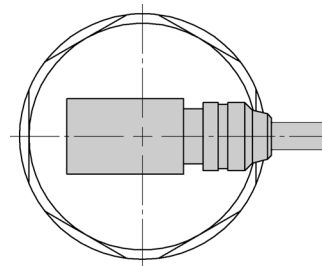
Connector BKS-S233-PU-____, axial outlet
